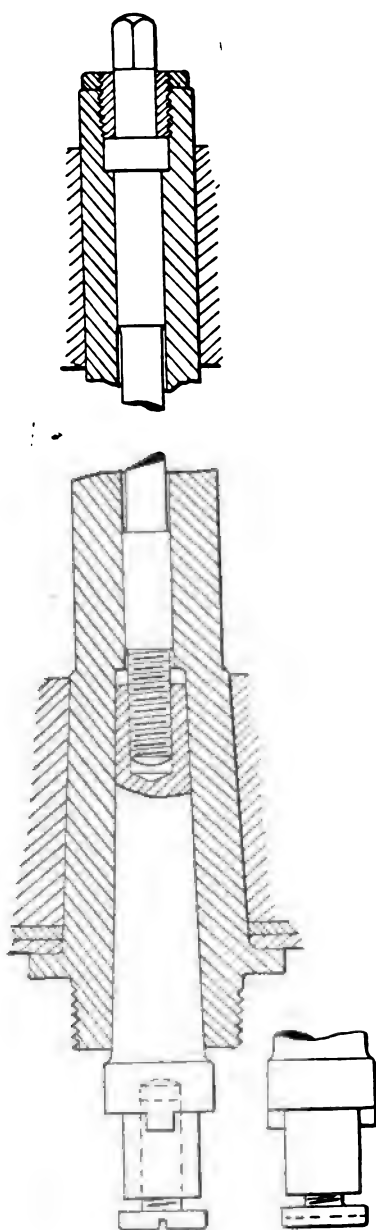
Arbor with Clutch Pieces, and Long Spindle Bolt.
